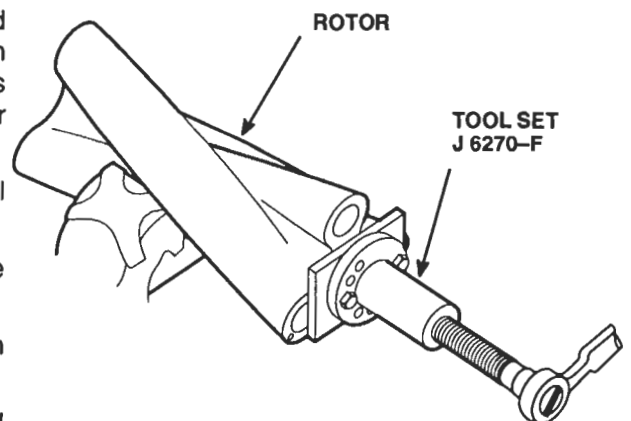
Removing Oil Seal Ring Carrier from Blower Rotor Shaft
